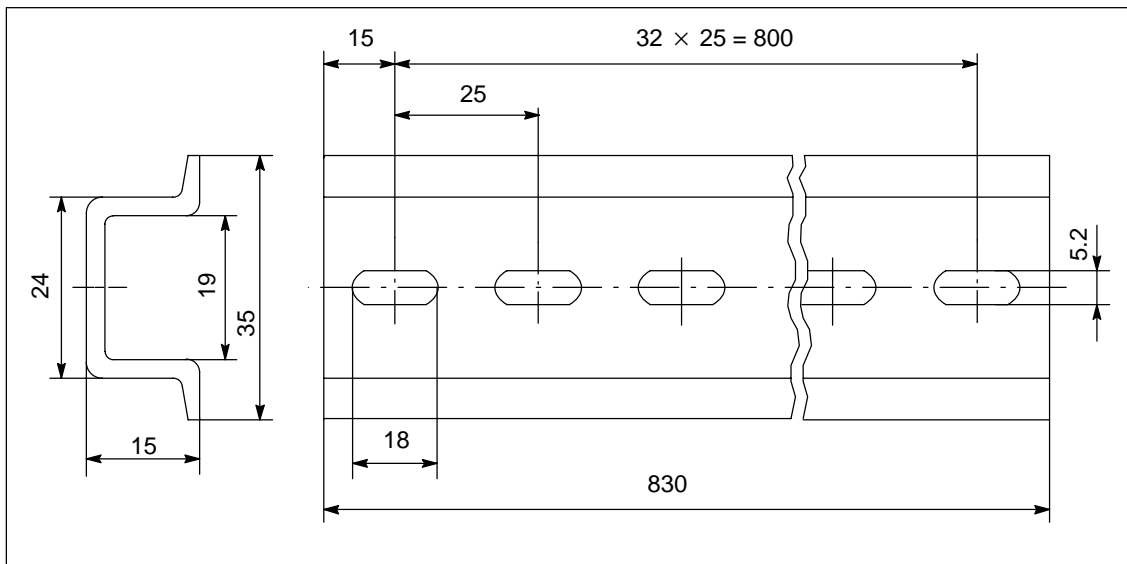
Dimension Drawing of the 830 mm Standard Rail
